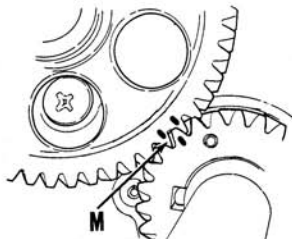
Align timing marks (M) as shown when reinstalling timing gears.
